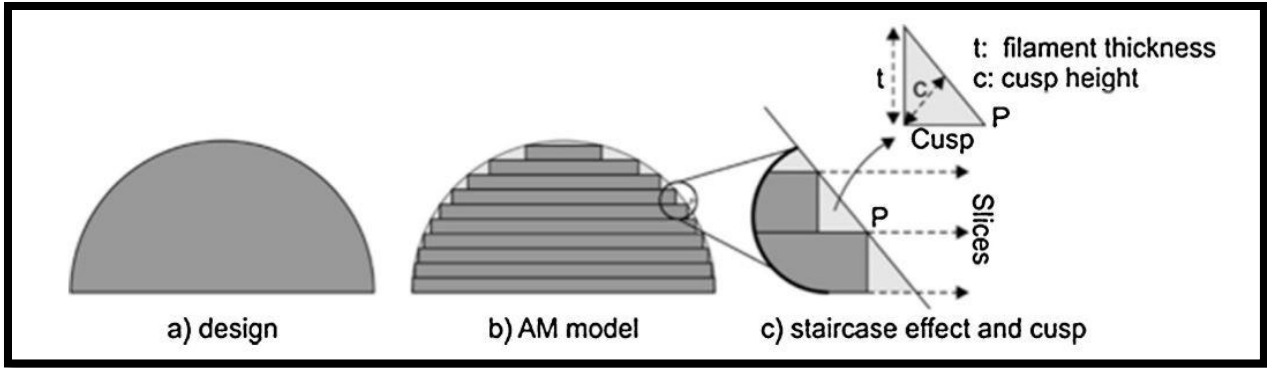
Difference Between CAD Surfaces and 3DP Part Surfaces.[19]
